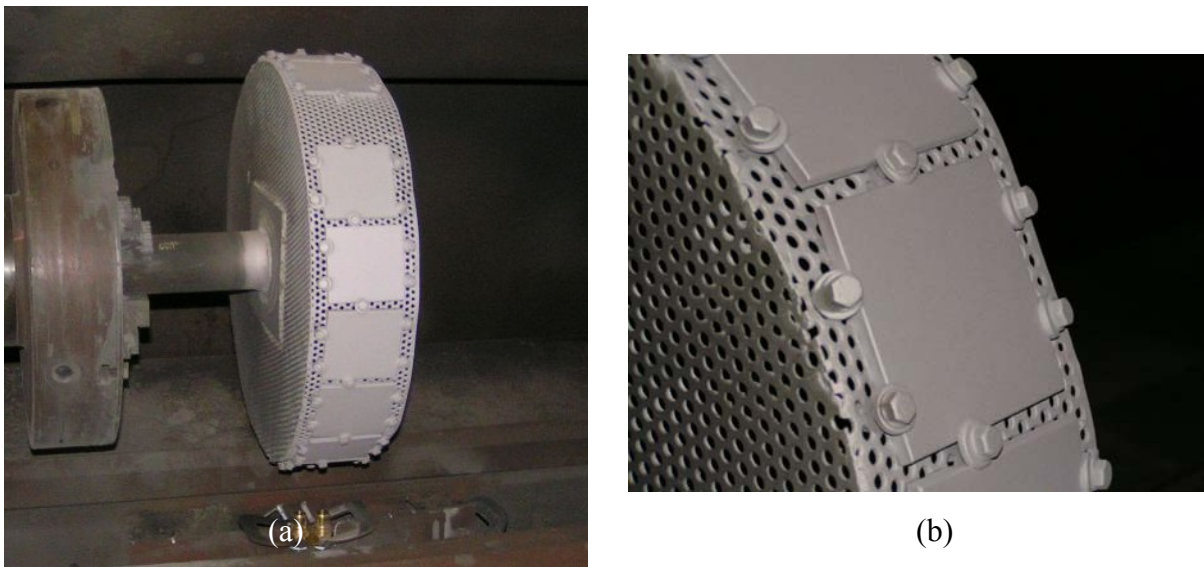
The initial qualification samples were sprayed in a manner similar to the containers with the specimens mounted to a 711 mm diameter wheel (a). Washers were used to mount the specimens on the wheel (b).
